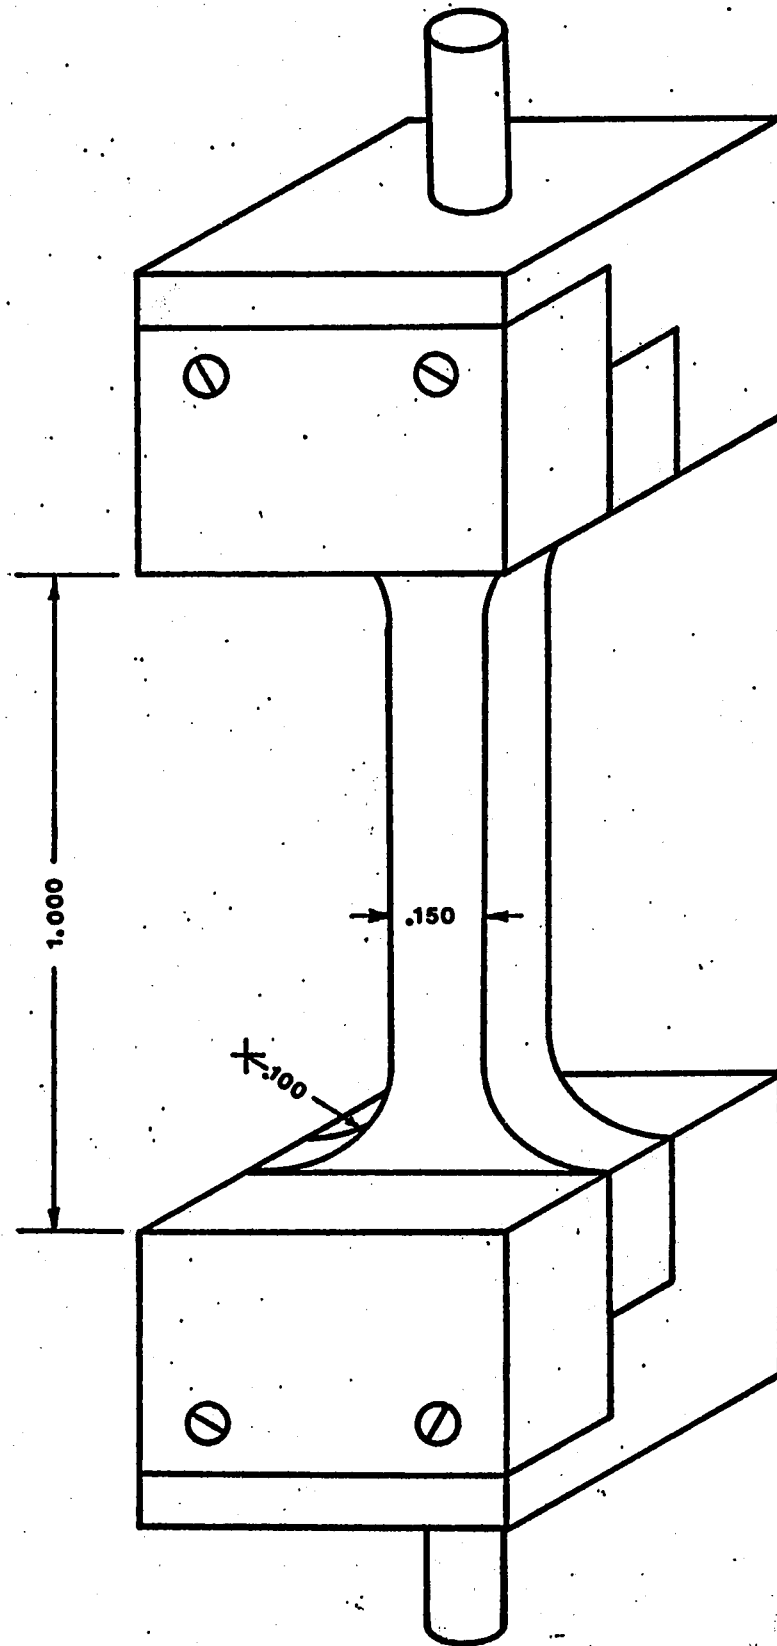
RUBBER SPECIMEN TEST FIXTURE
